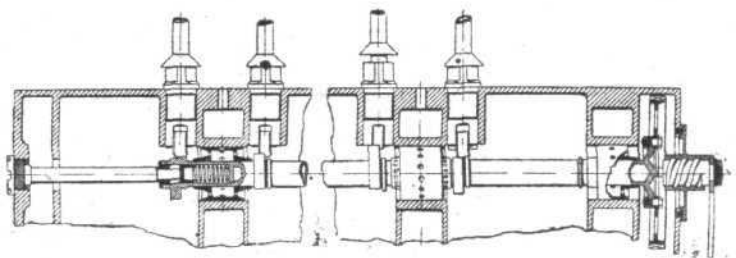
Arrangement of exhaust camshaft and half-compression gear.
